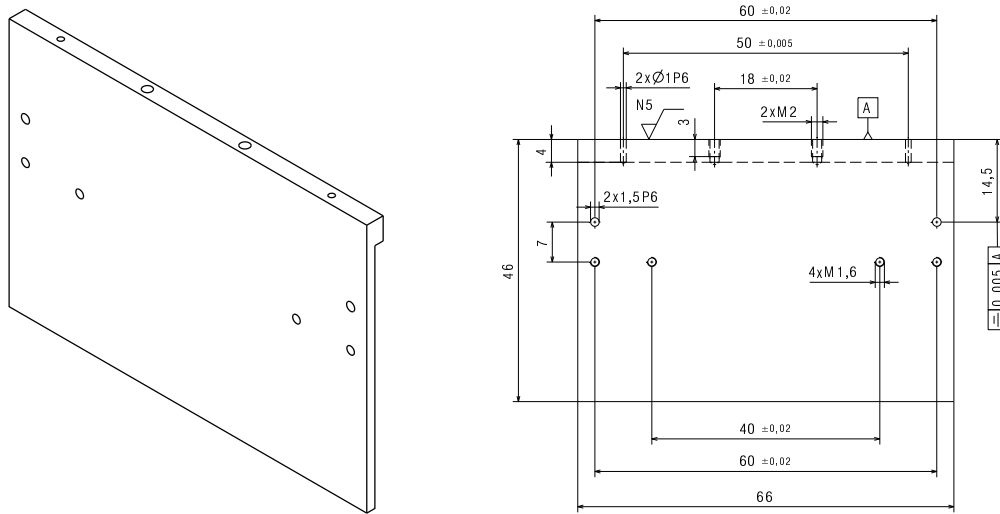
Isometric view and technical drawing of the prototype balcony.
